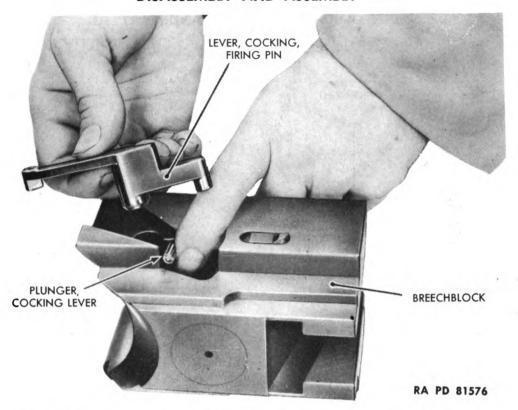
Removing the Firing Pin Cocking Lever, Cocking Lever Plunger, and Cocking Lever Plunger Spring
